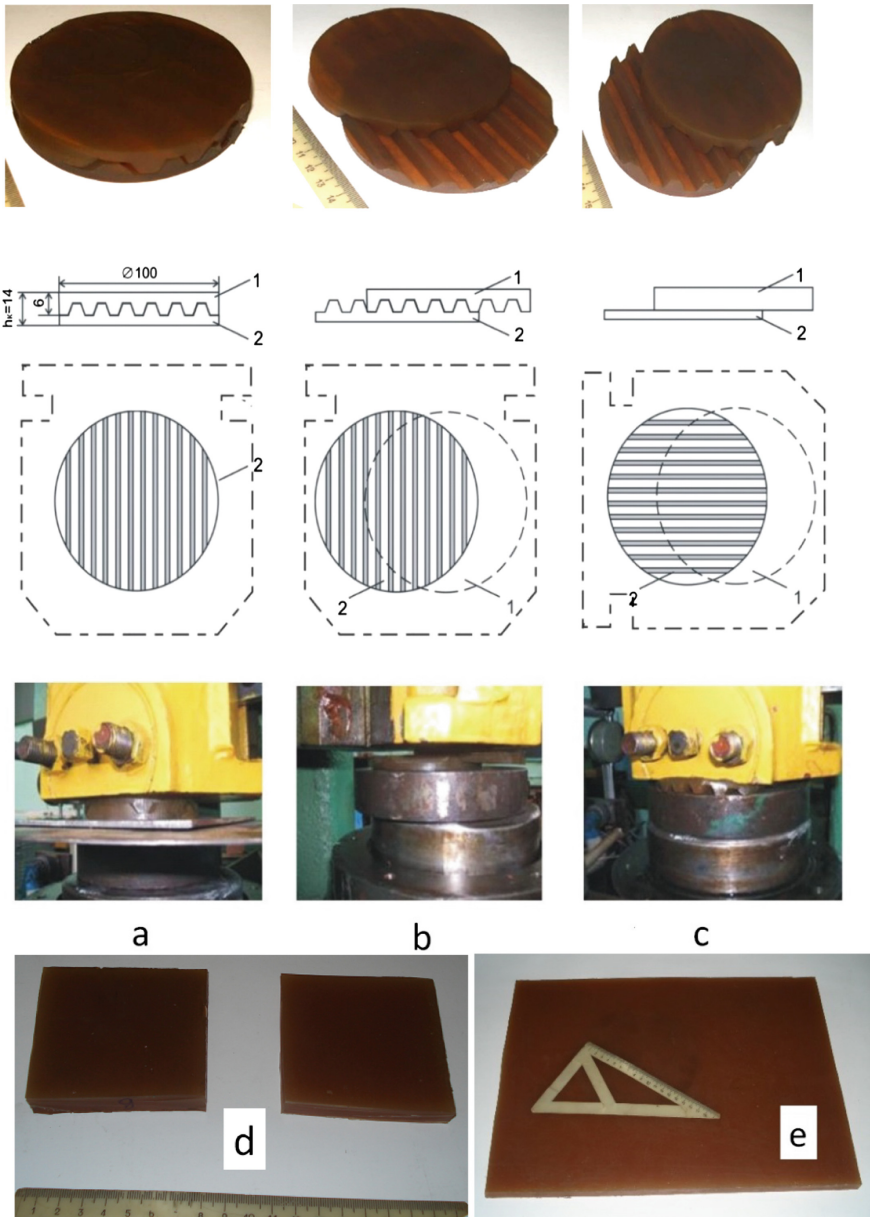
The design of the two-layer embossed compensator (a) in the closed form, (b) when expanded transversely and (c) along a press table; the design of a flat plate-compensator with dimensions (d) 81×76 mm and (e) 190×220 mm. 1 – the upper plate; 2 – the lower plate.
